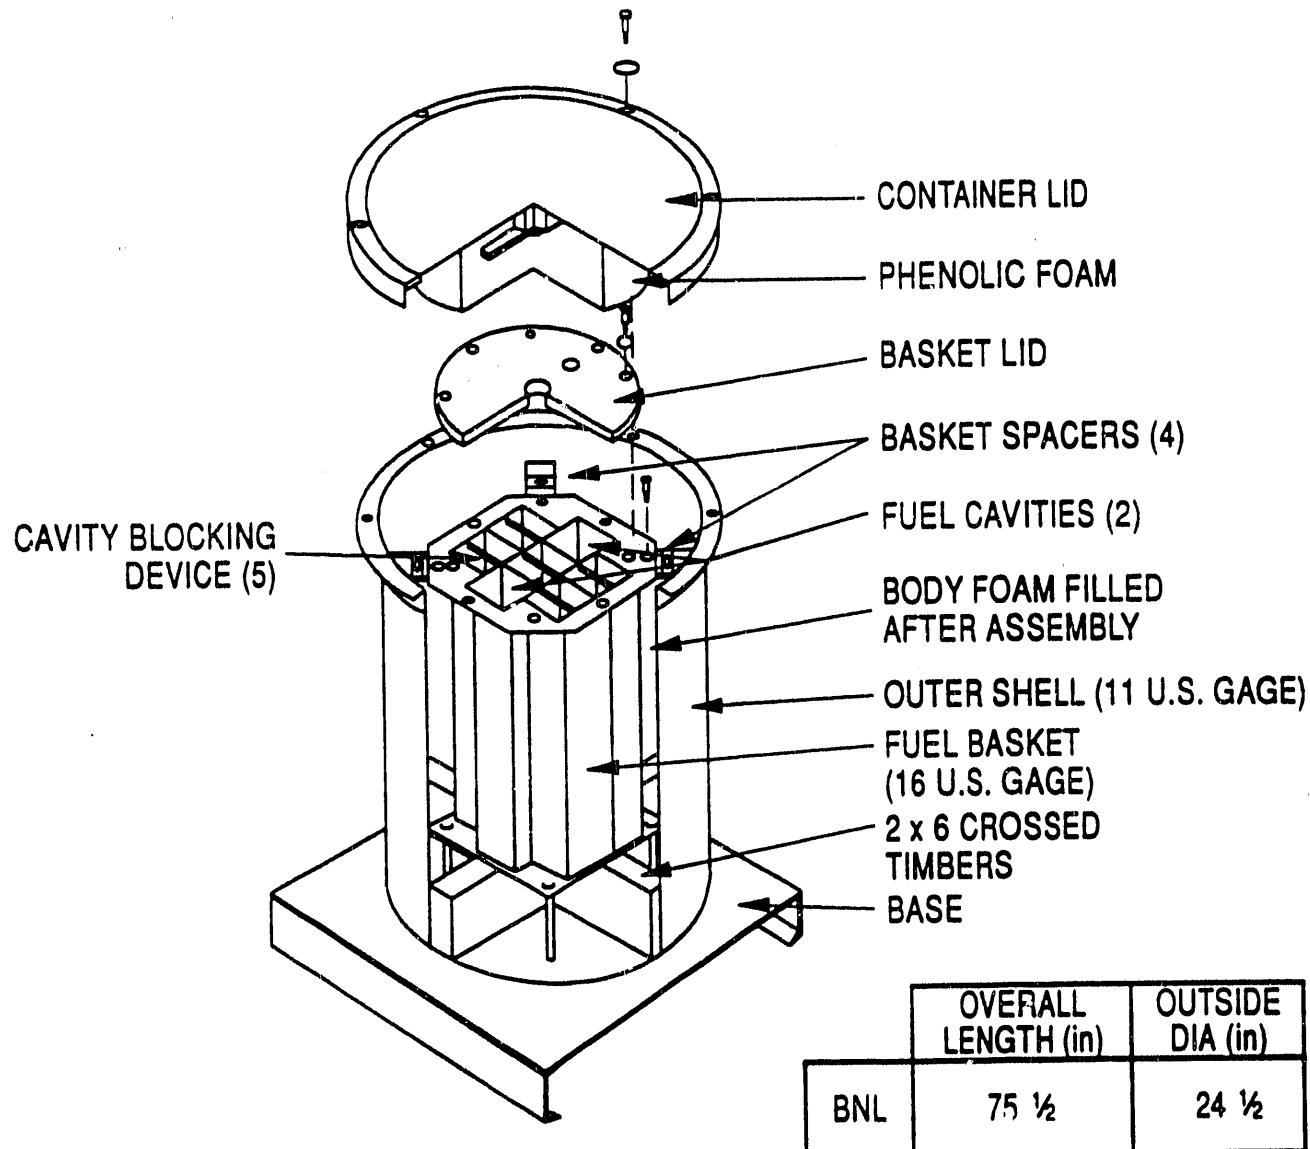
HFBR Unirradiated Fuel Shipping Container
